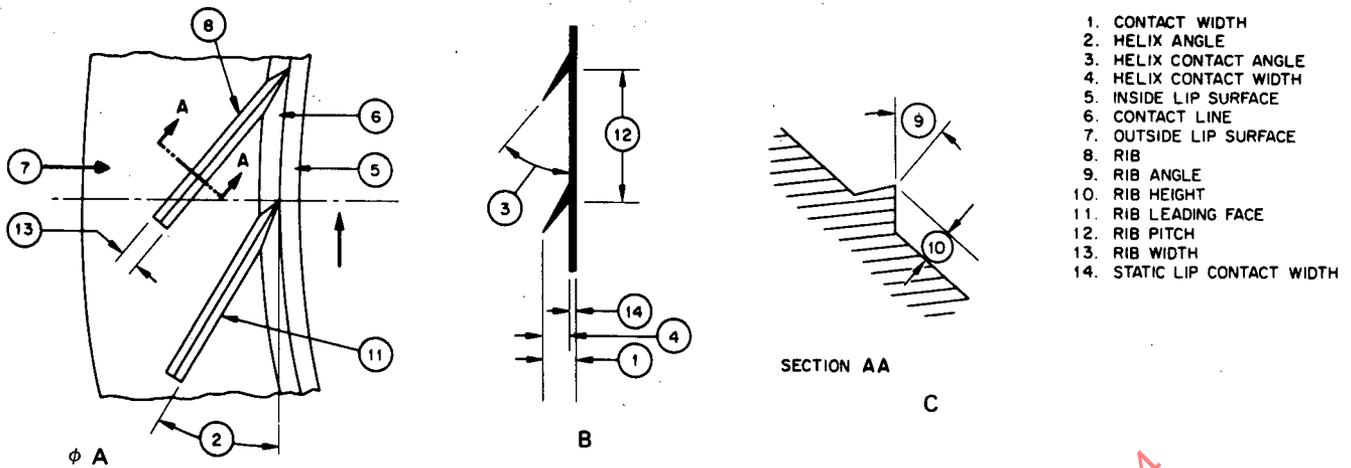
NOMENCLATURE FOR OUTER LIP SURFACE AND CONTACT SURFACE. DETAILS OF RADIAL LIP SEAL (HELIX SEAL TYPE): (A) VIEW IN PLANE OF OUTSIDE LIP SURFACE, (B) VIEW OF CONTACT SURFACE, (C) CROSS SECTION OF RIB
